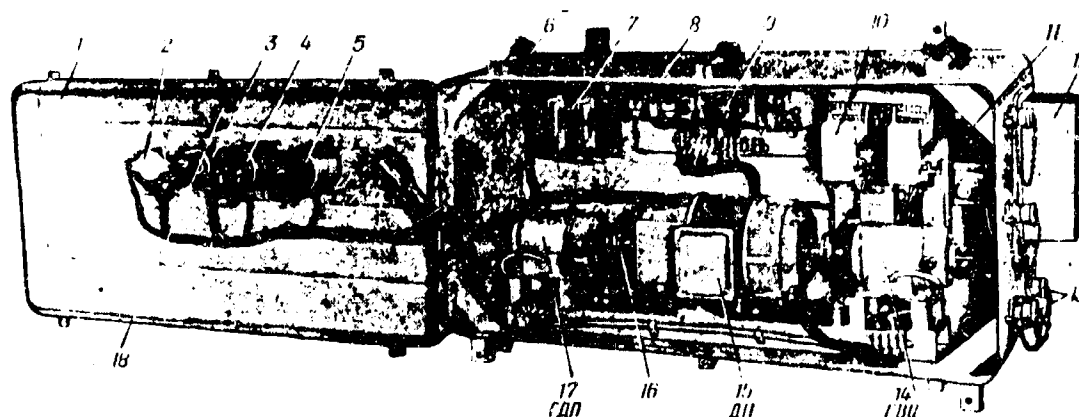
Control Cabinet of Semiautomatic Machine: 1 - front panel (cover) of cabinet; 2 - cutoff switch BK of oxygen valve; 3 - device for adjusting the supply of wire; 4 - ammeter; 5 - voltmeter; 6 - coupling clamp; 7 - fuses; 8 - frame of cabinet; 9 - unit of relays; 10 - contractor (main starter); 11 - shunt; 12 - oxygen valve KK; 13 - plug-in connections for linking the welding cable and the leads to the control circuits; 14 -  $\Gamma \Pi \Pi$  generator to the control circuits (auxiliary); 15 -  $\Gamma \Pi \Pi$  - electric drive motor; 16 - clutch; 17 -  $\Gamma \Pi \Pi$  generator of motor for supplying wire; and 18 - indicator bulb.
